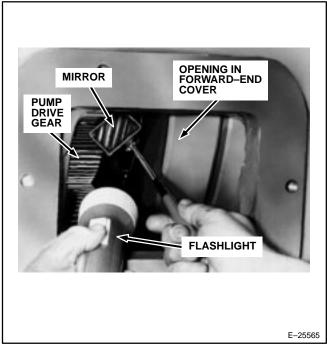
Checking Pump Drive Gear Match–Mark Numbers.
